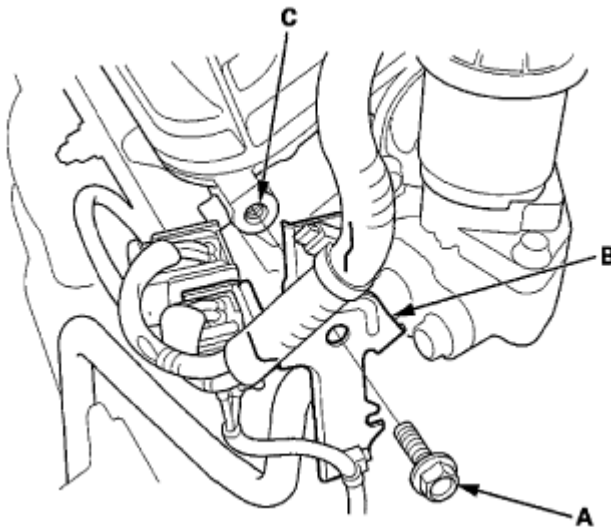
Identifying Bracket Bolt Hole And Connector Bracket Bolt
